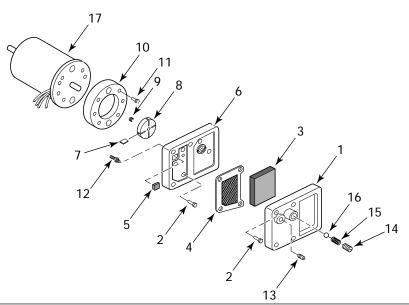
Motor and Pump Assembly for Models 3E218E and 3E219D
